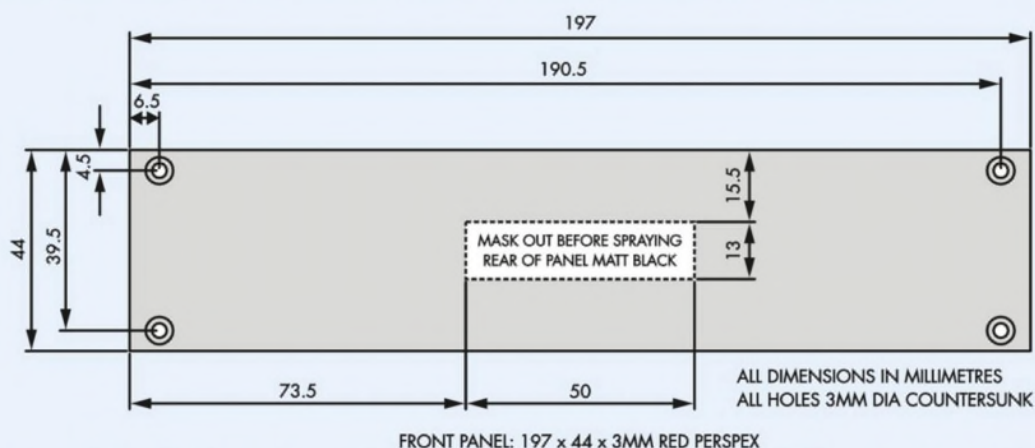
the front panel is made from 3mm red perspex. Drill and countersink carefully because the material fractures easily. The back of the panel is sprayed matte black, except for the display window shown dotted
